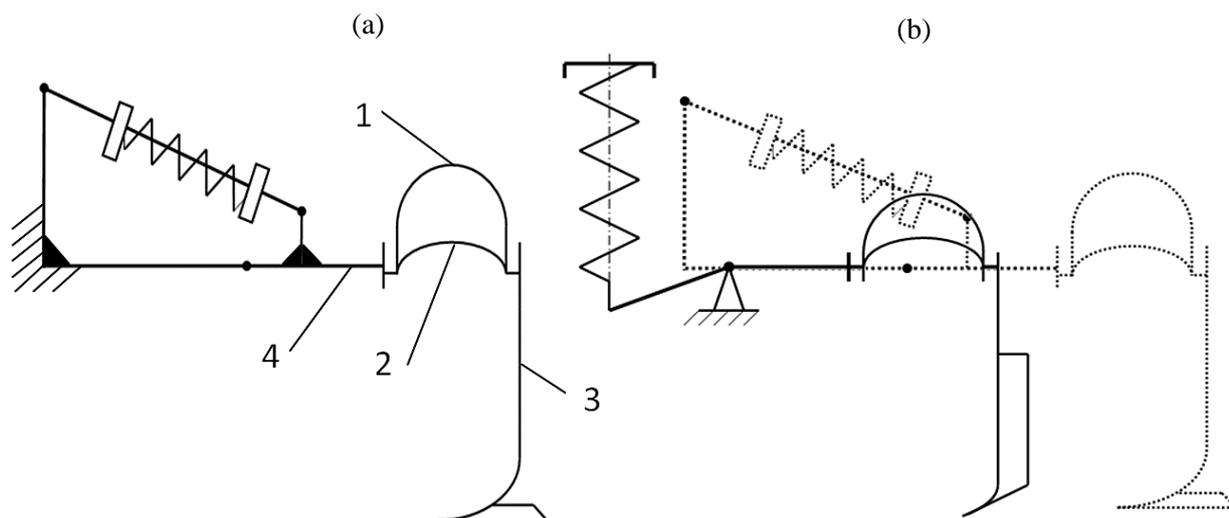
Constructive and technological layout of the section design upgrade: a) for the central working body; b) for side working bodies; 1- elastic suspension; 2- limiting clamp; 3- upright of the working body; 4- pivot bracket.
